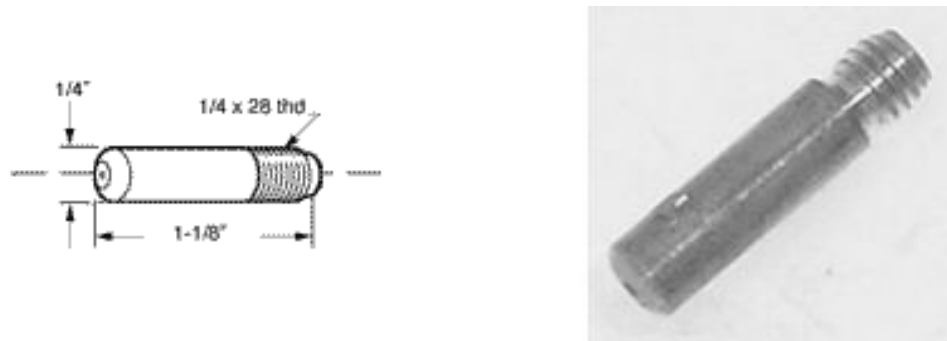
A schematic drawing (left) and a picture (right) of a commercially available conventional tube contact tip sold today (Model GA-17C). The smallest wire size that can be used is 0.023 in. diameter. In this study, 0.016 in. diameter wire will be tested, creating a need for a custom contact tip.
